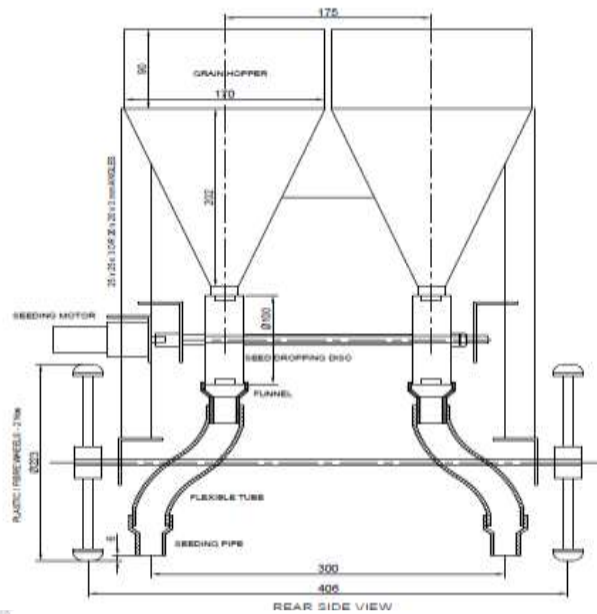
Crosssectional View of Seed Sowing Mechanism.
